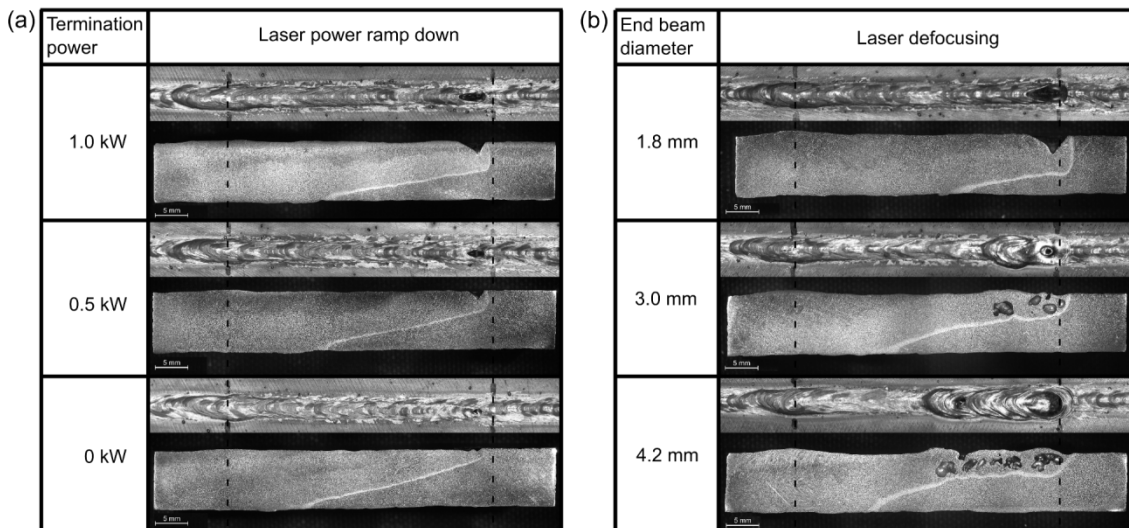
Bead surface and longitudinal macrographs of weld overlap of; (a) laser power ramp down welds, (b) laser defocusing welds
